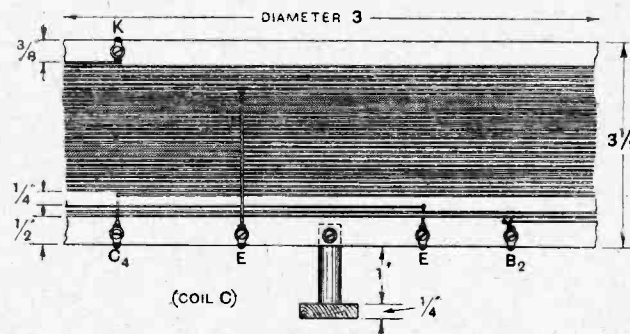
Constructional details of the third transformer, comprising coil C and the coupling coil
